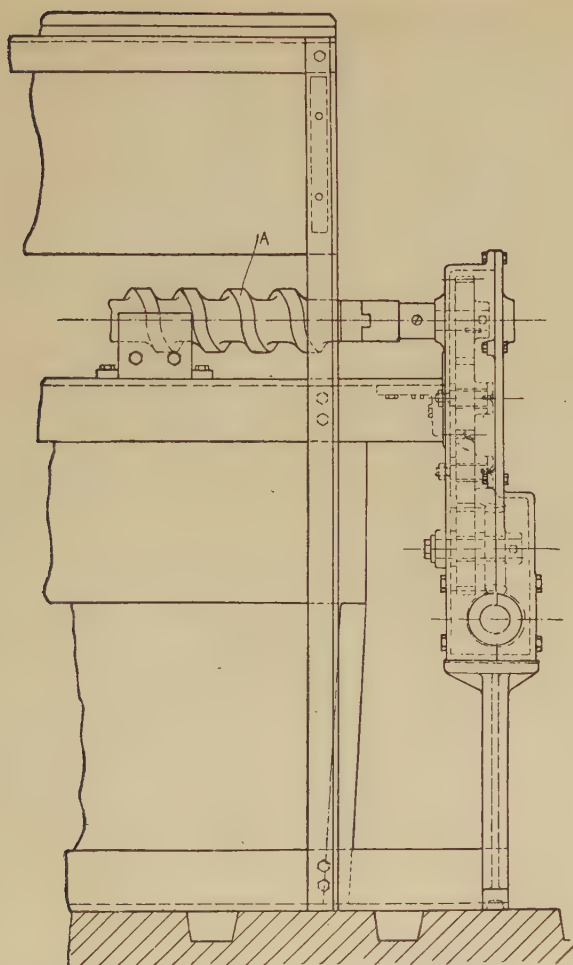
Side View Part of Washing Machine, Fig. 94. (Courtesy of C. G. Haubold A. G., Chemnitz.)
